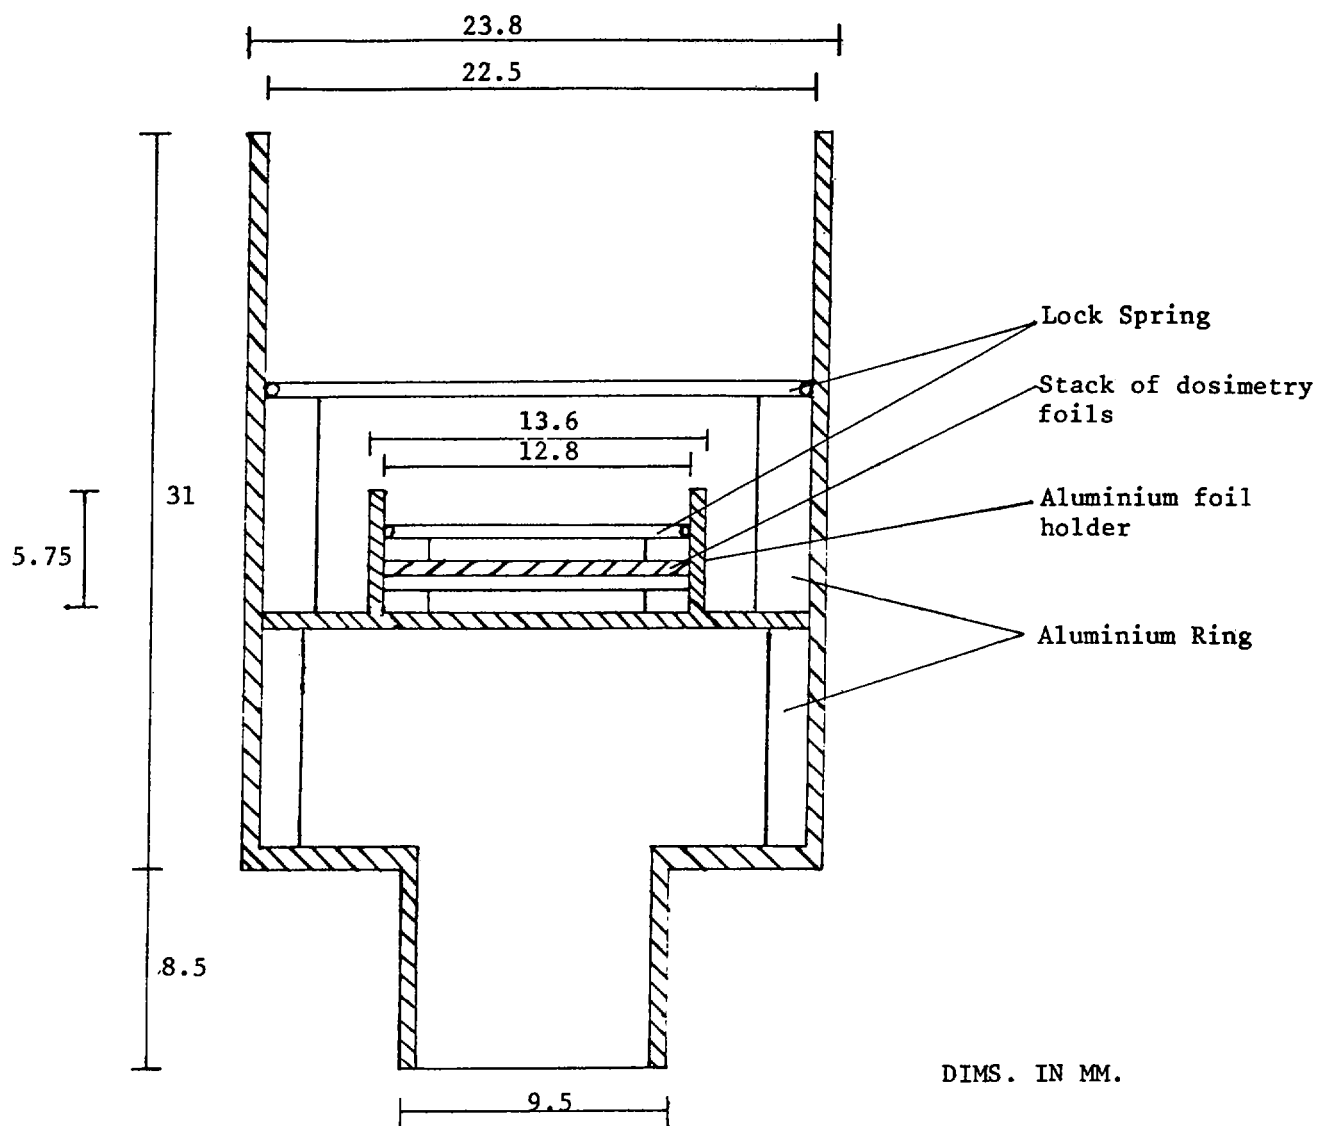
Schematic diagram of an aluminium tube with aluminium foil holder positioned inside.
